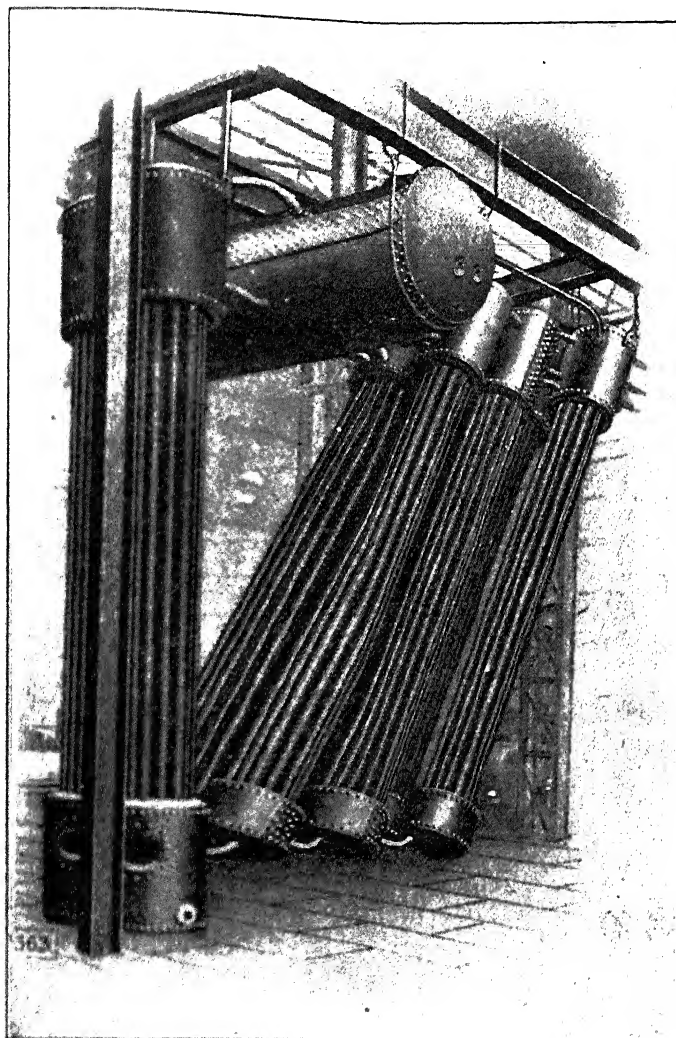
Water-tube boiler, fitted with straight-tubed heating surfaces associated with "headers" lying at the same more nearly vertical angle as the tubes.
